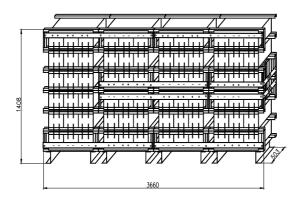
$\,$ 48V (three parallel connections/six floors and four columns)
